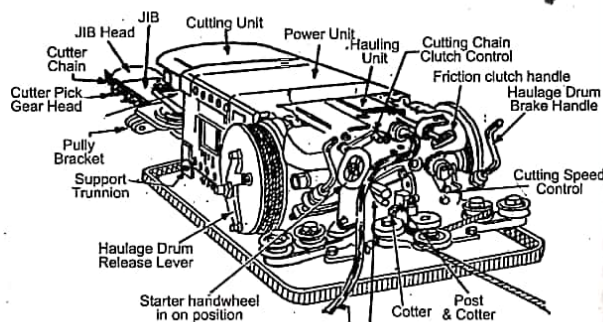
A typical coal cutting machine, Shortwall type.
